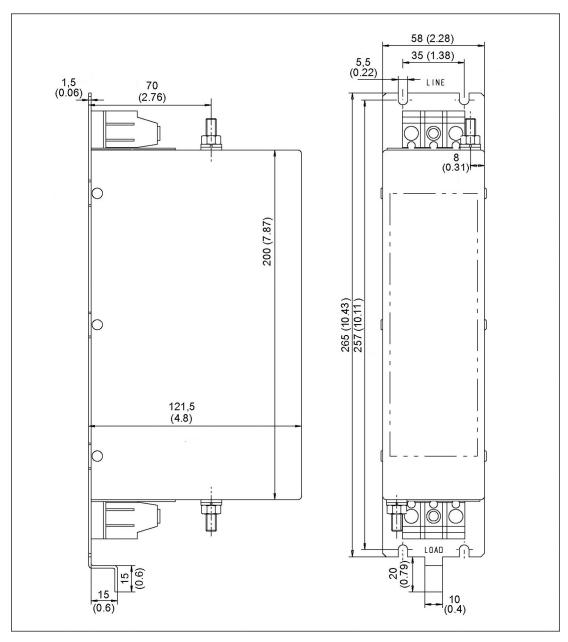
Dimension drawing of Basic Line Filter for 5 kW and 10 kW Smart Line Modules, all dimensions in mm and (inches)
